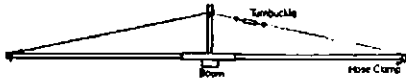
To prevent boom sag a 2 ft. length of $\frac{1}{2}$ " steel tubing was welded to the side of the boom mount. A 3" $\frac{1}{4}$ " diameter is welded to the top of the rod as a hook to support the $1/8$ " stranded steel cable. The tension is adjusted with the turnbuckle.
